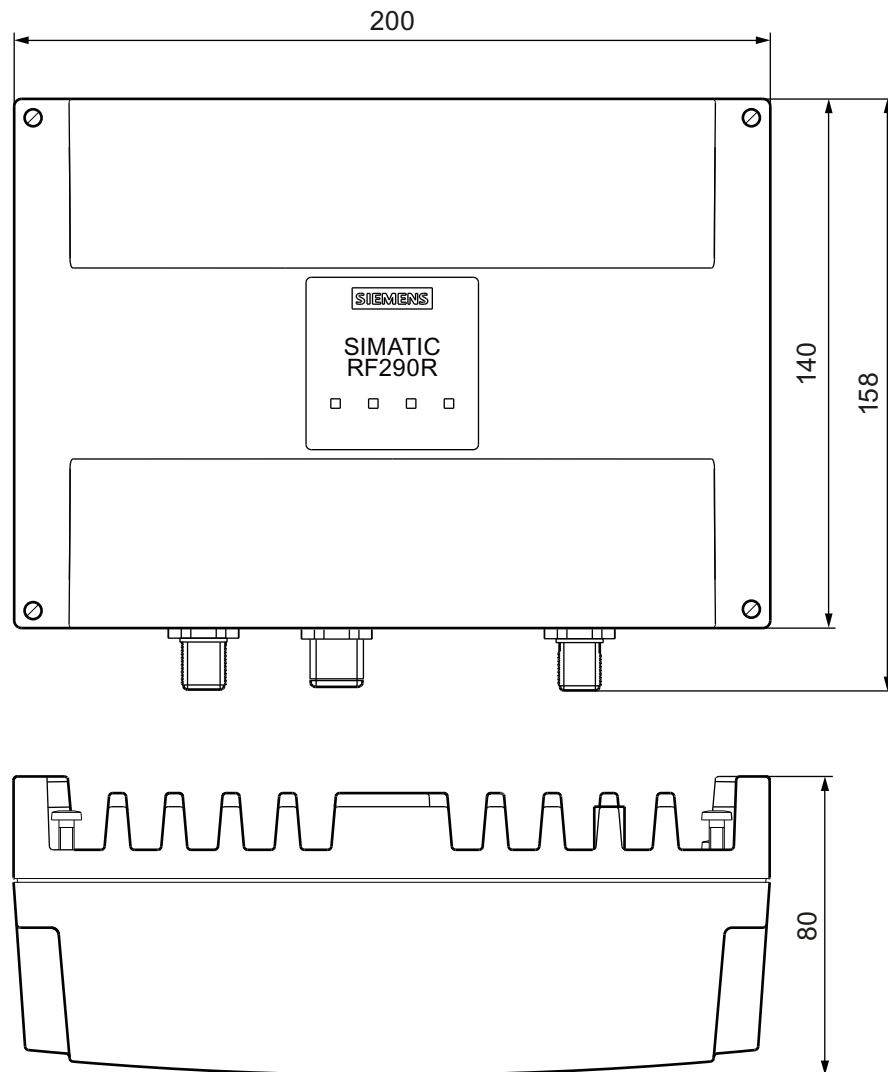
Dimensional drawing RF290R (dimensions in mm)
